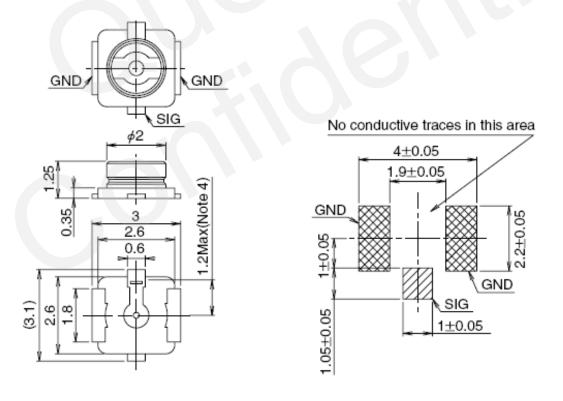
Dimensions of the UF.L-R-SMT Connector (Unit: mm)
